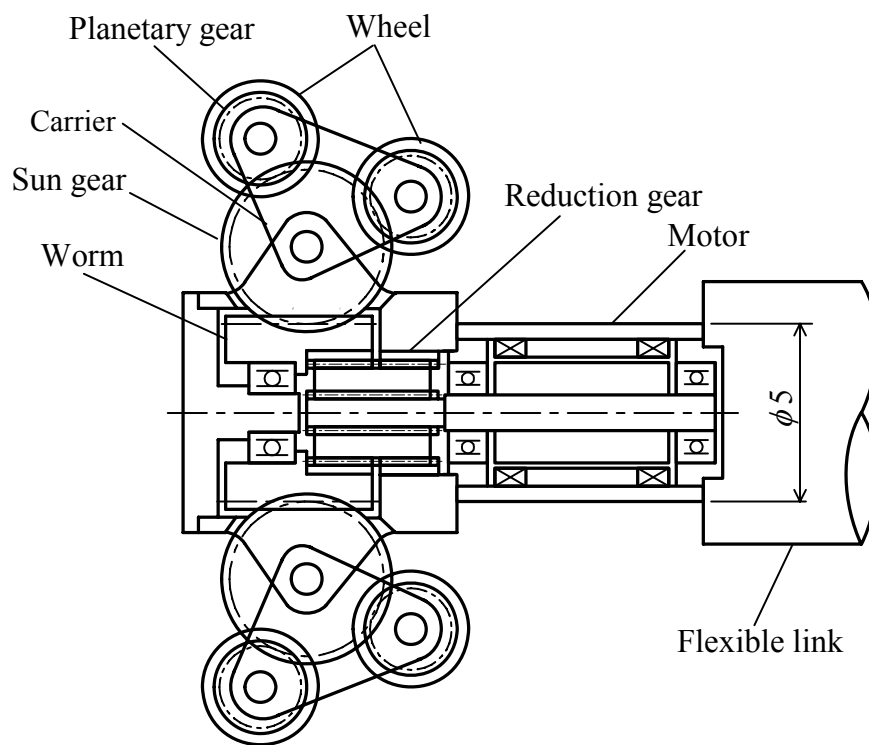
Cross-sectional view of the wheel drive mechanism for small pipes
